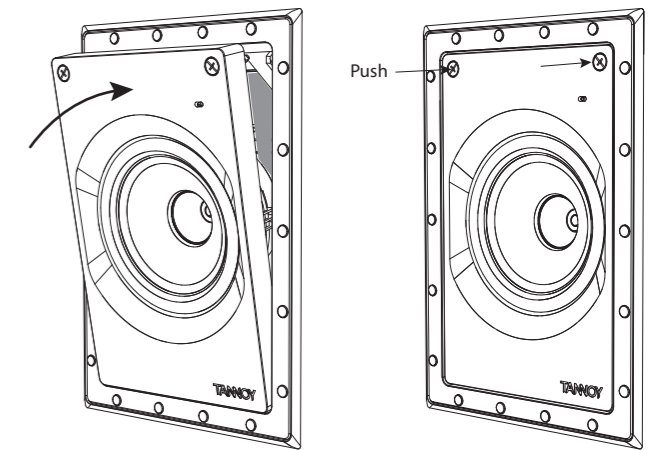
Installing the Loudspeaker Assembly into the Frame
